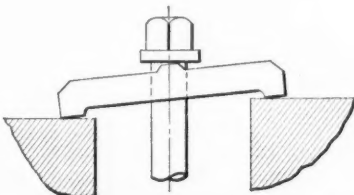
Action of Clamp shown in Fig. 38 when used to clamp Work which is not Level with the Clamping Surface.
